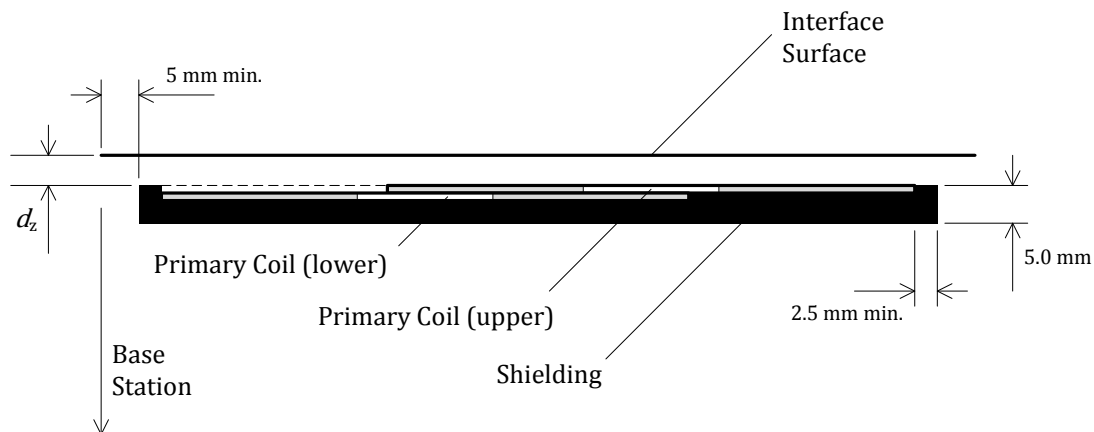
Primary Coil assembly of Power Transmitter design A4
